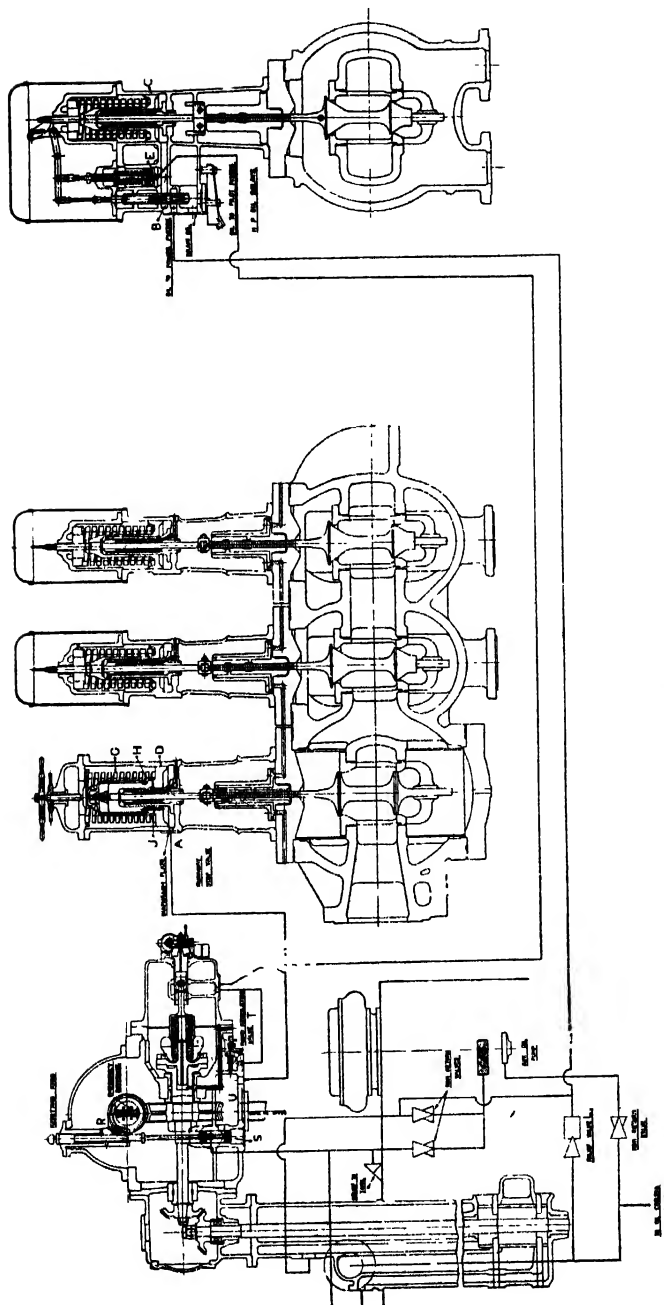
Section through Steam Chest and Diagrammatic Arrangement of Governor and Valve Gear.
